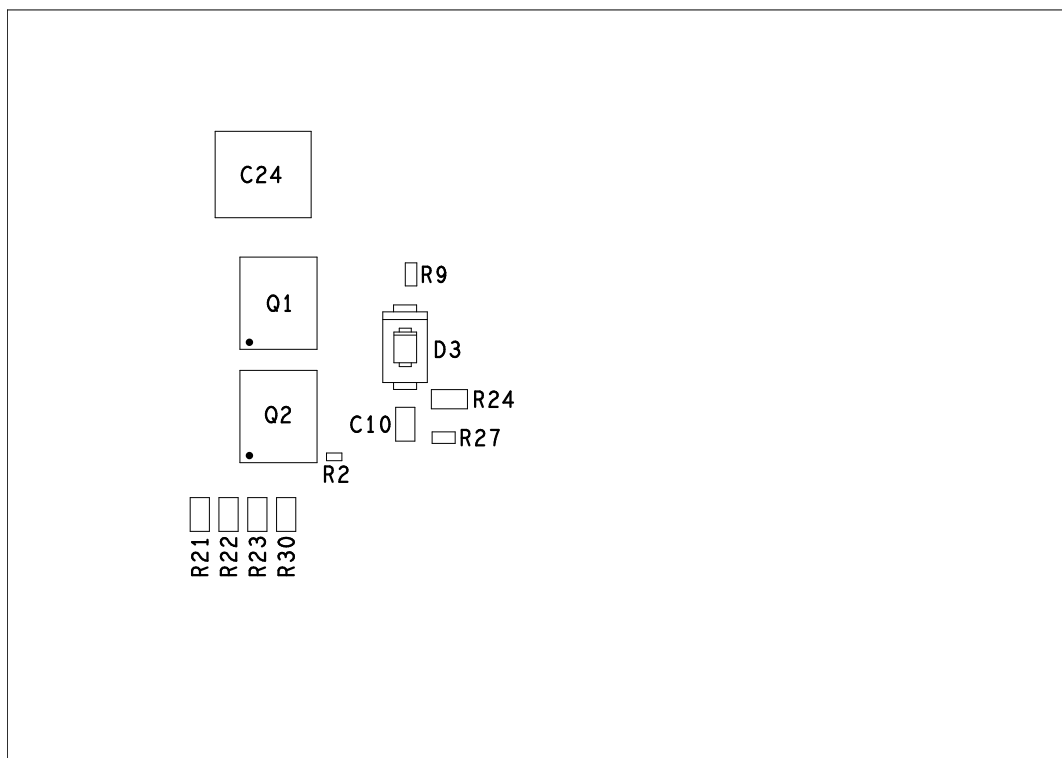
EVSTDRIVEG600DG - Layout (top layer)
